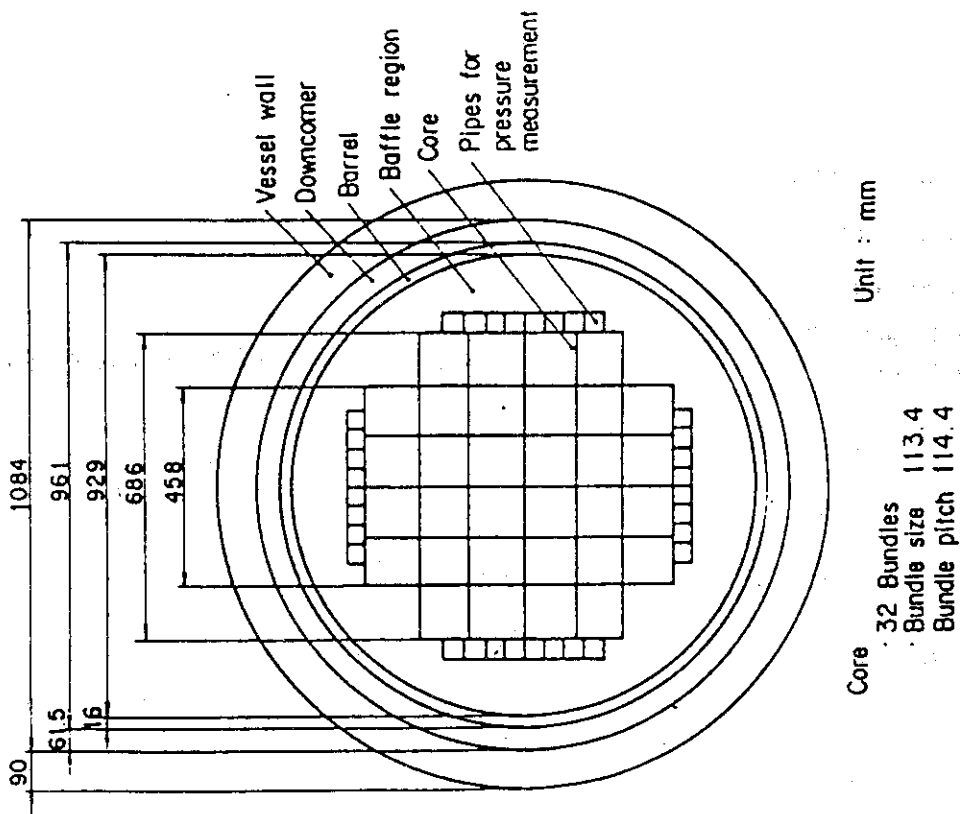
Dimension of CCTF Core-II pressure vessel cross section
